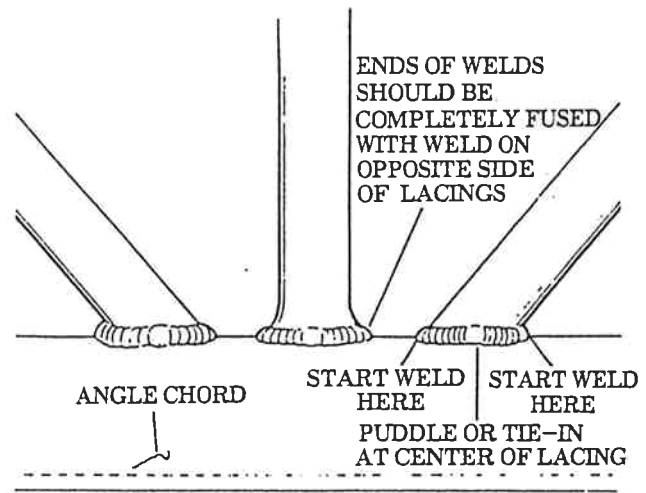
Welding Lacings to Angle Cord
